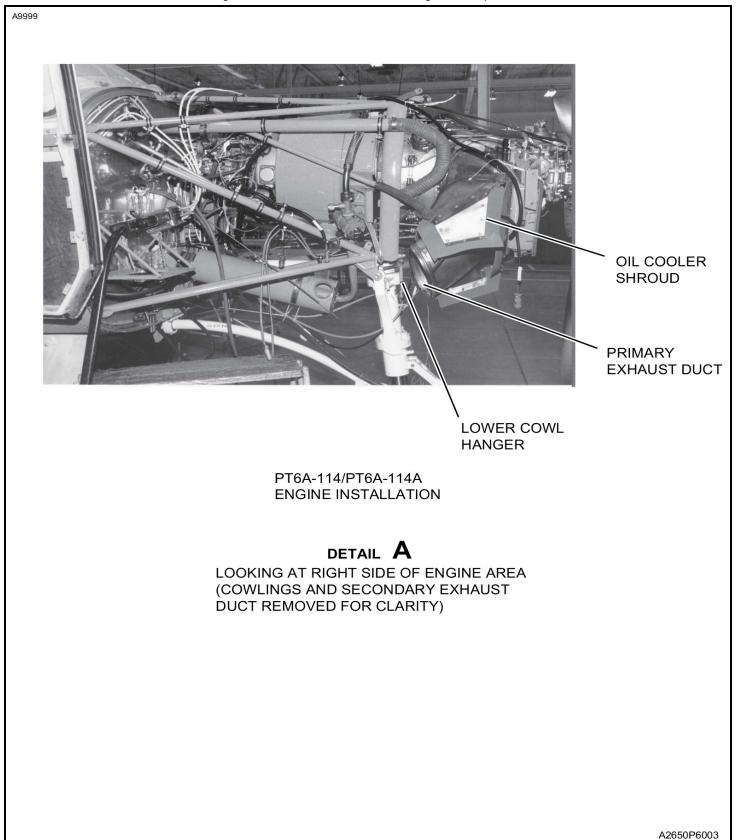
Sheet 3 : Exhaust Duct Alignment Inspection
